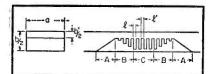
Mechanical drawing of tapered corrugated surface which replaces one face of the waveguide
